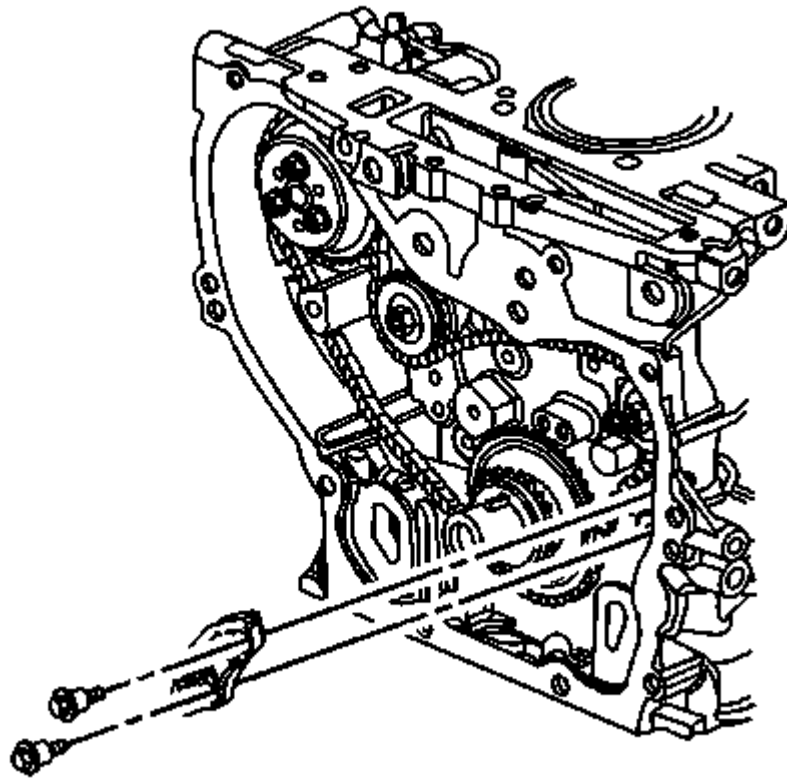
Identifying Small Balance Shaft Drive Chain Guide
